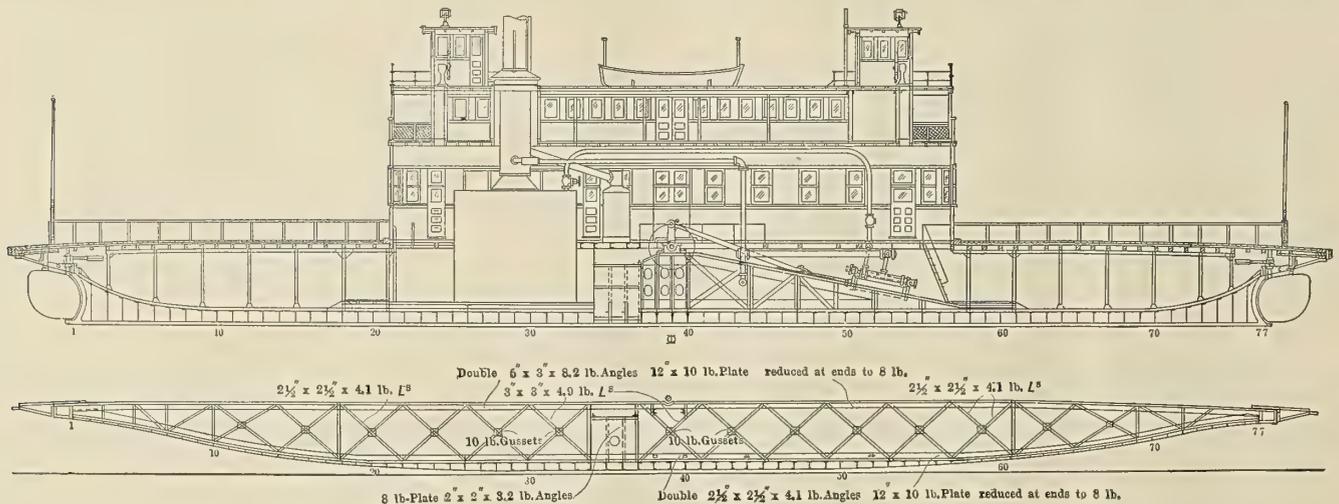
INBOARD PROFILE AND SECTION THROUGH LONGITUDINAL TRUSS OF LAKE WASHINGTON FERRY
